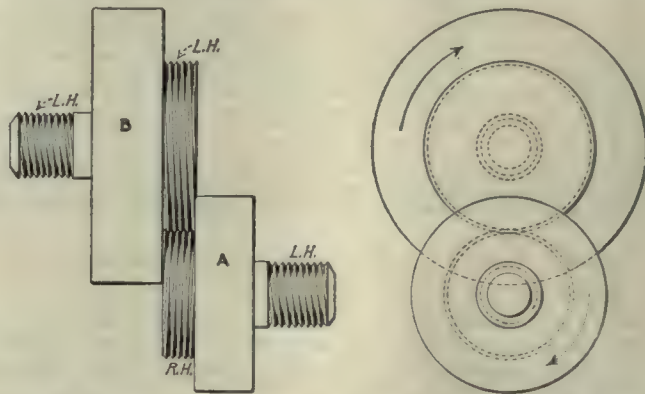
SKETCH OF ROLLS USED IN MACHINE SHOWN IN FIG. 1
